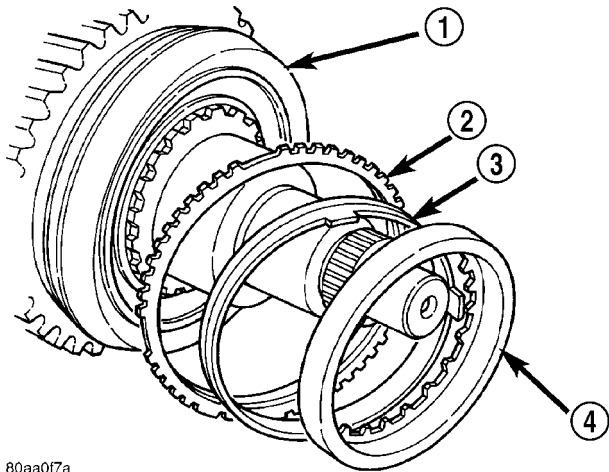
SECOND GEAR CLUTCH CONE SNAP RING
